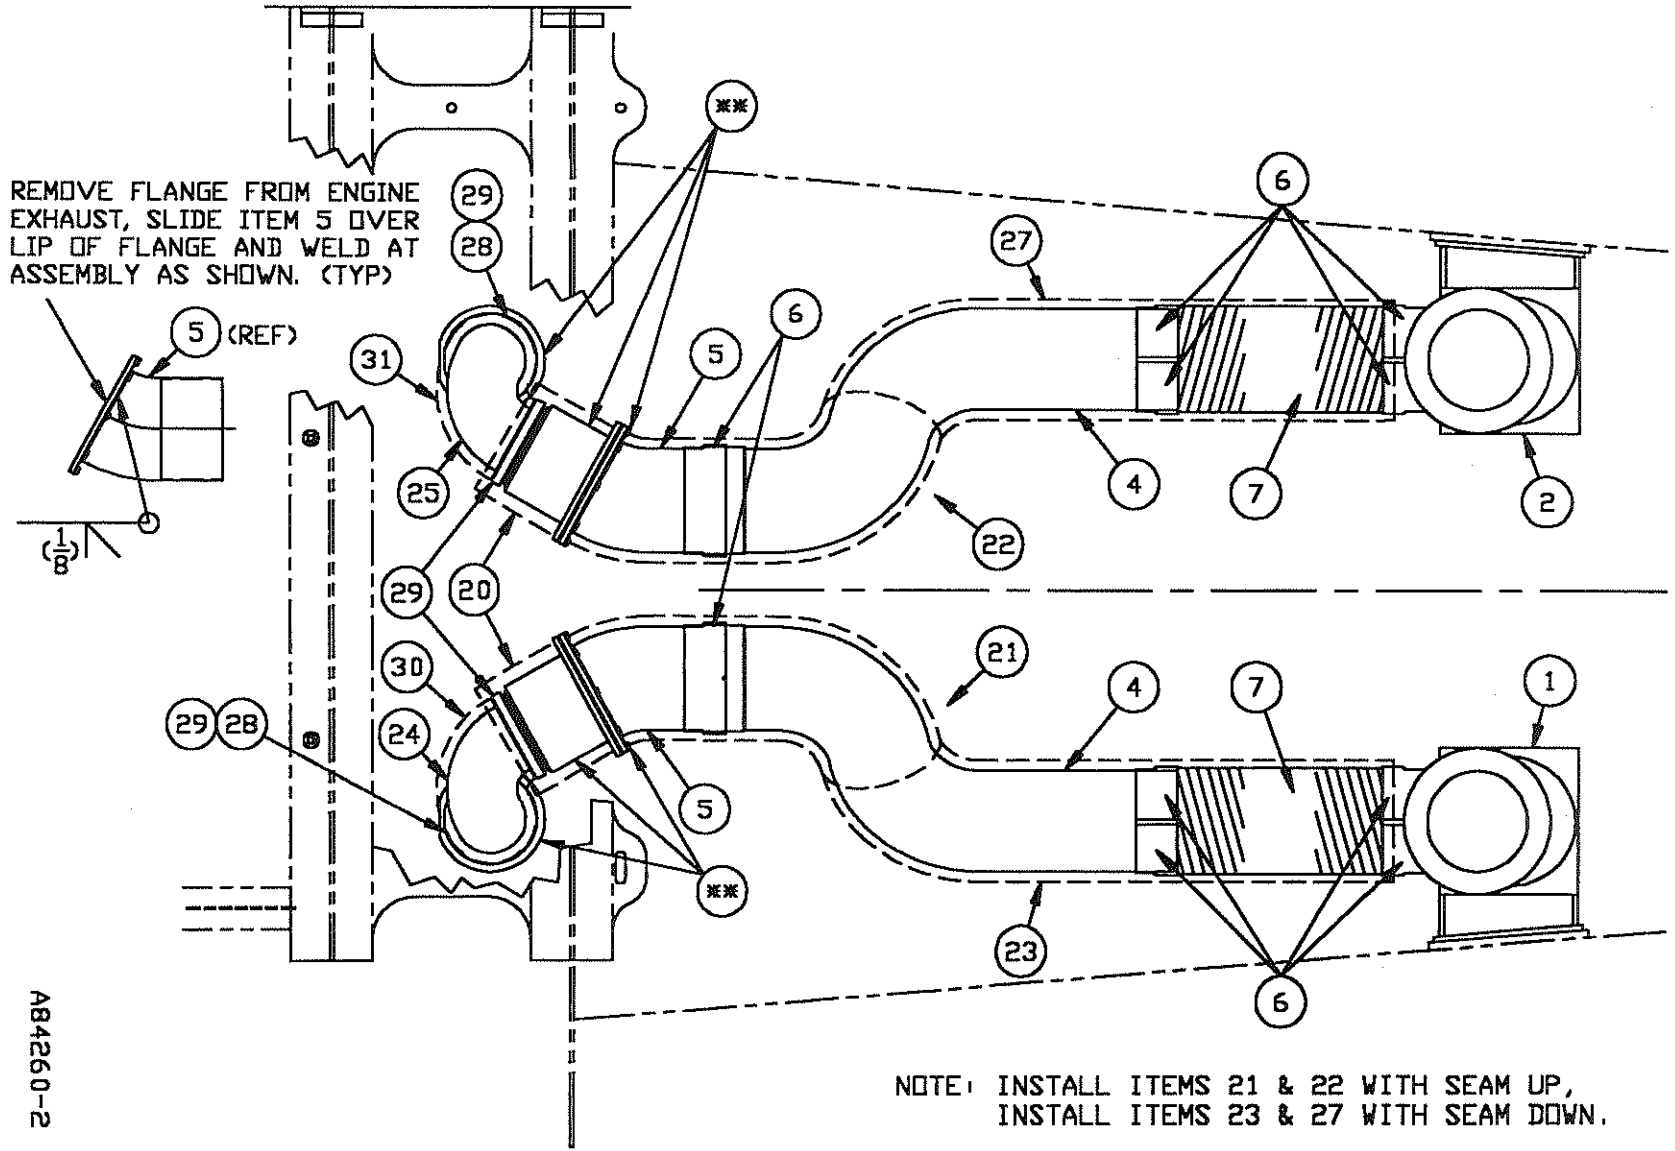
DUMP BODY HEATING EXHAUST ASSEMBLY
